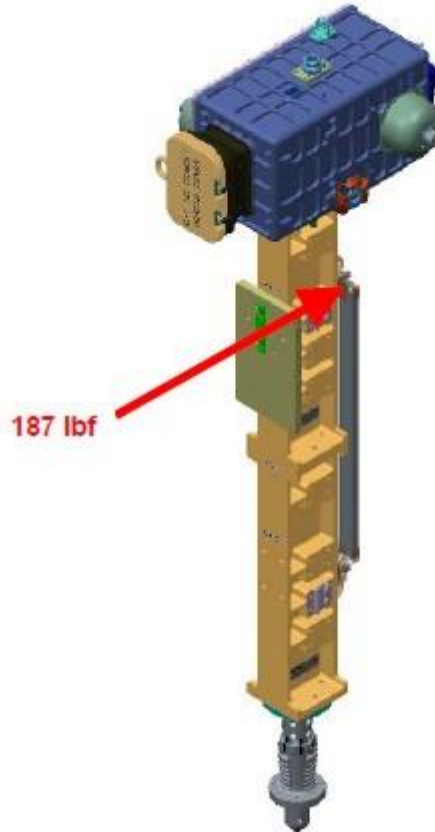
187 lbf Secondary Translation Load Applied to Handrail
